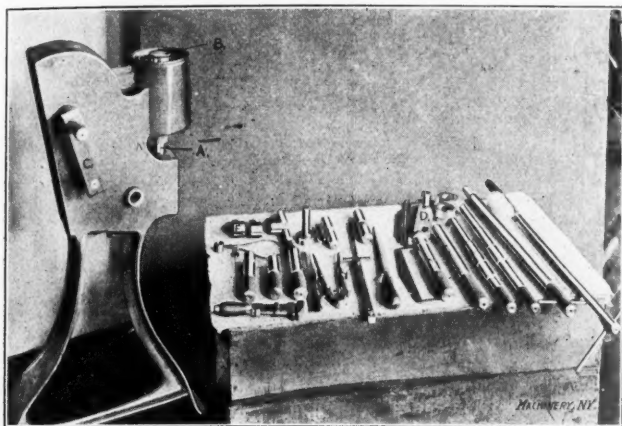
Tools used by the Inspector in testing the Work done on the Frames
